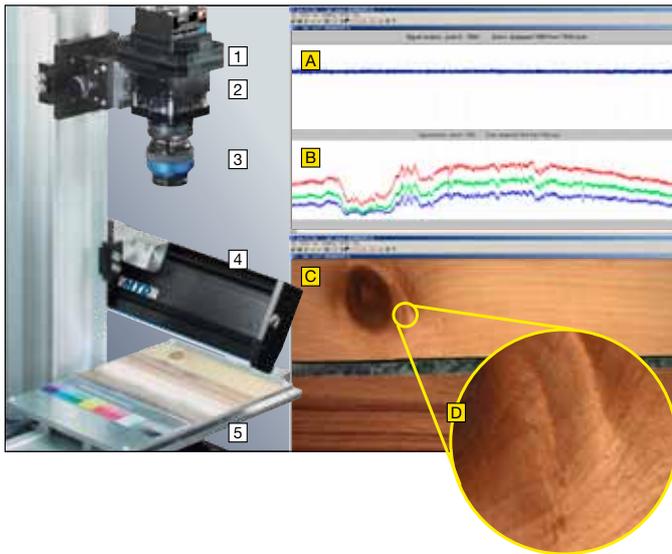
Surface inspection of wood using the SK22800GJRC-XC
